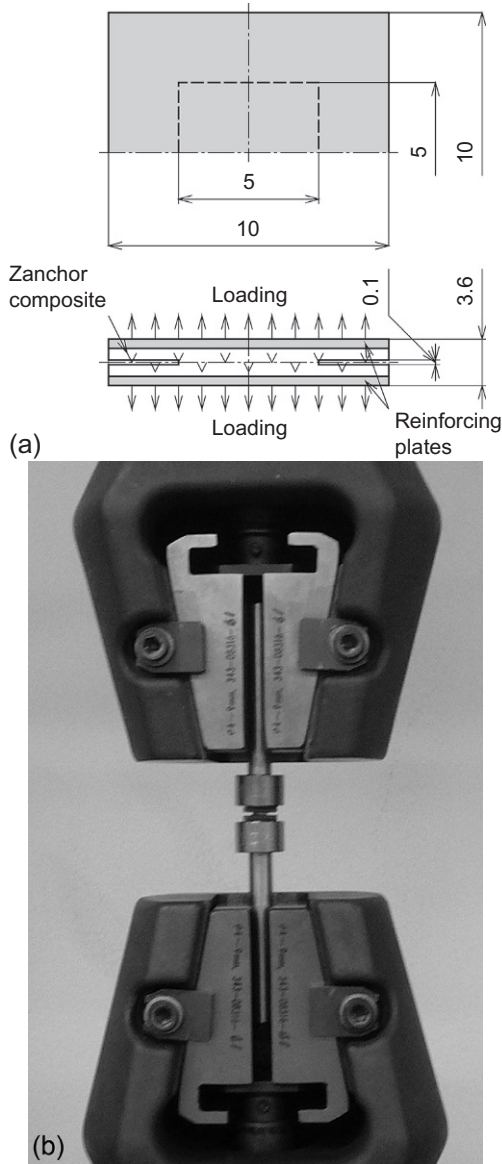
Through-thickness tension specimen. (a) Specimen. (b) Fixtures.
